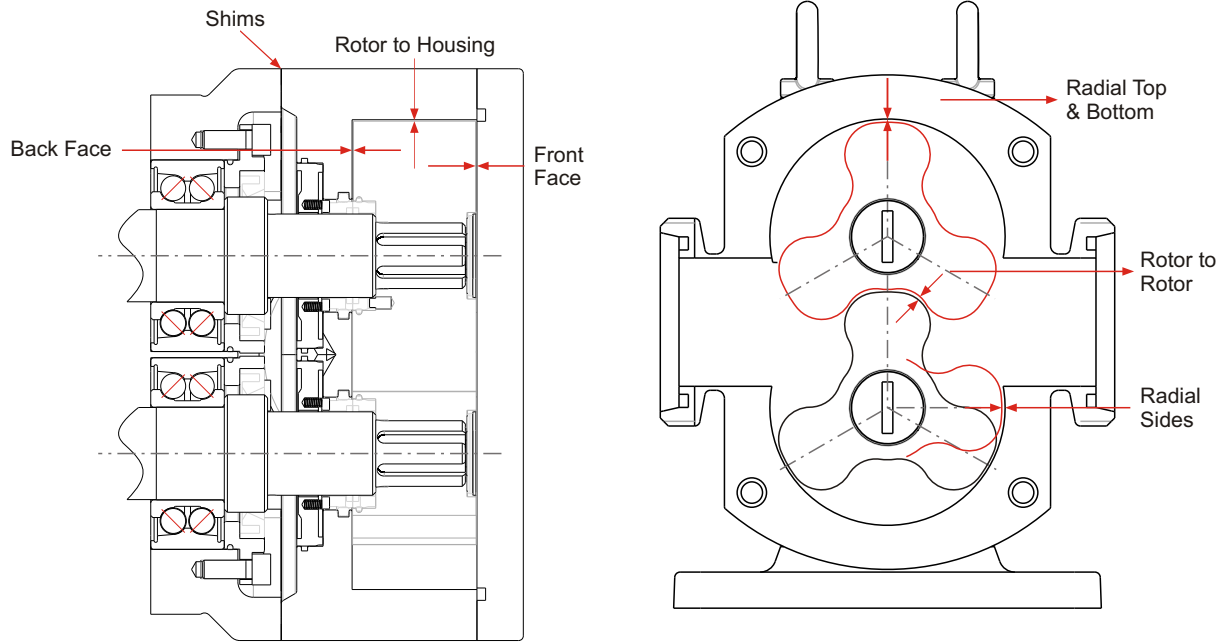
Shows the rotor clearances of PETROLAND Pump.
